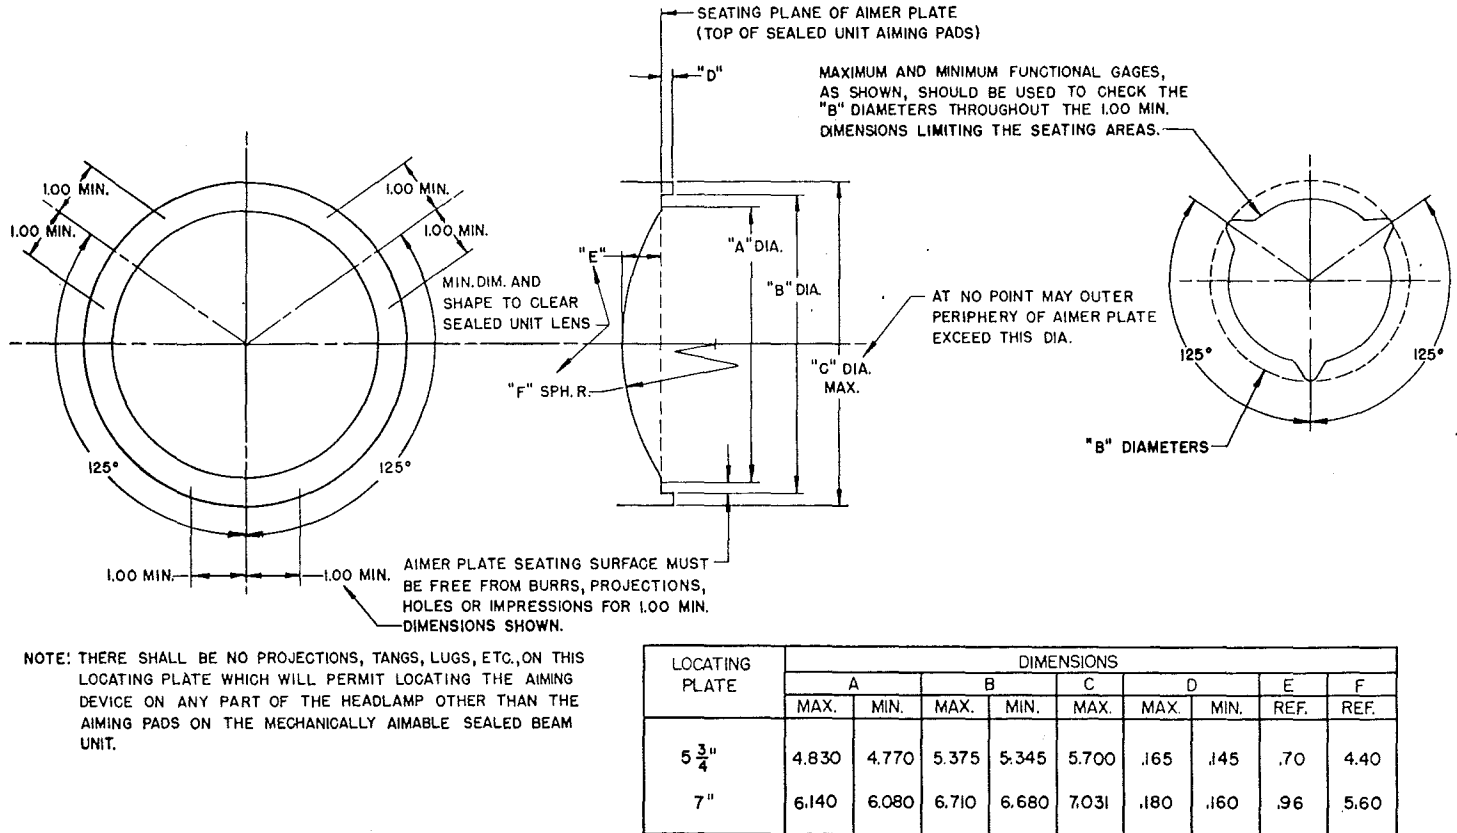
DIMENSIONAL SPECIFICATIONS FOR HEADLAMP AIMER LOCATING PLATE
